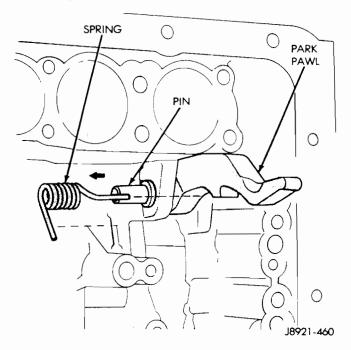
Removing/Installing Park Pawl-Pin-Spring
